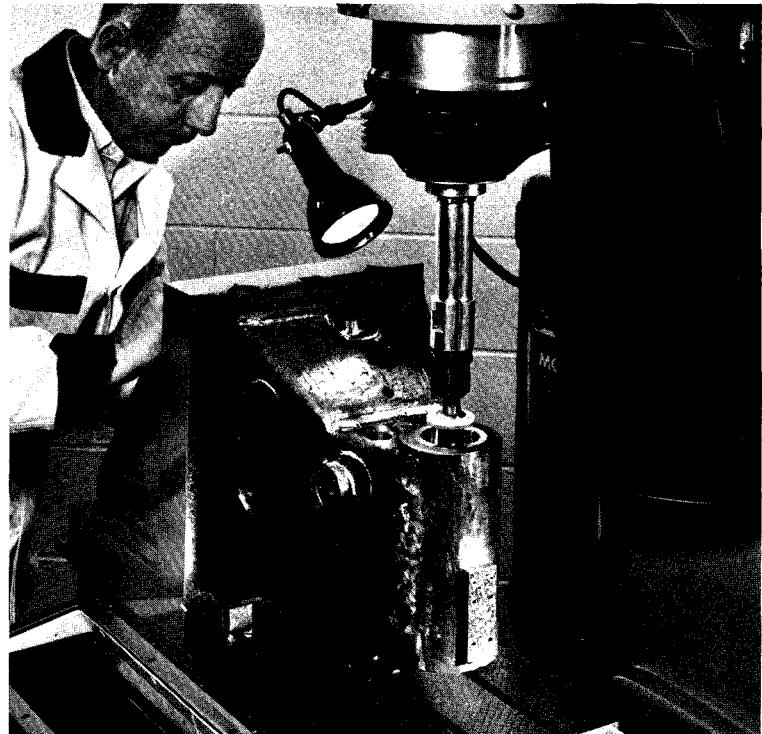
To establish alignment of the quill to the housing ways, the hardened bushings in the quill housing are jig ground while the quill housing is mounted on a sturdy angle iron.
